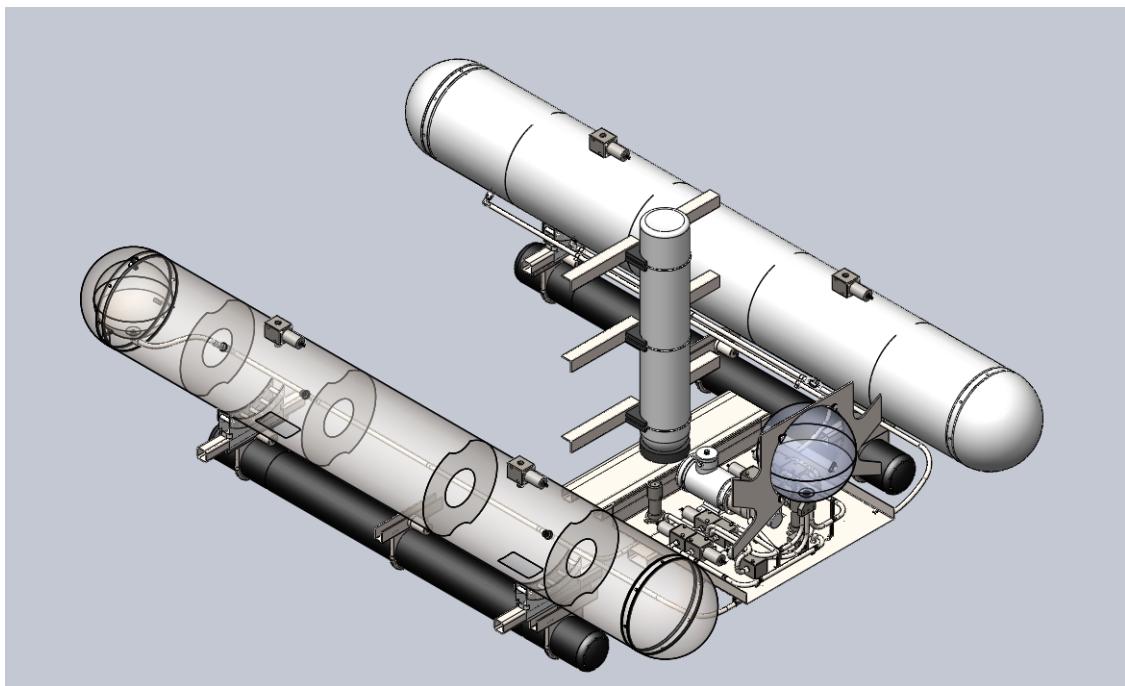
Assembly showing Minimum MBTs Size, VBT Capacity and Number of Air Bottles
